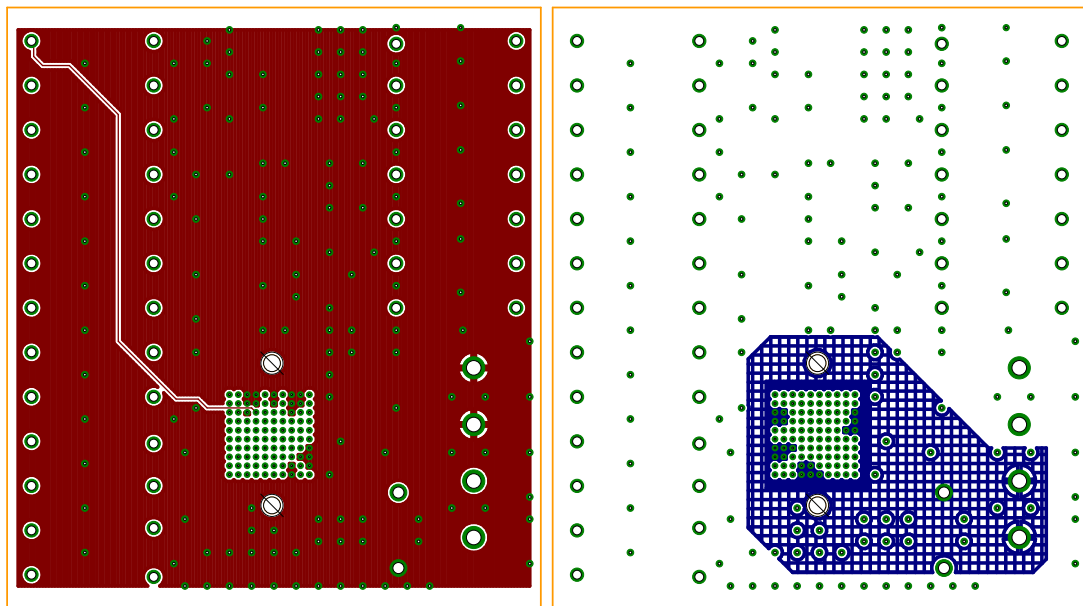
Bottom board for Interposer test, PCB design of all layers and schematic.
